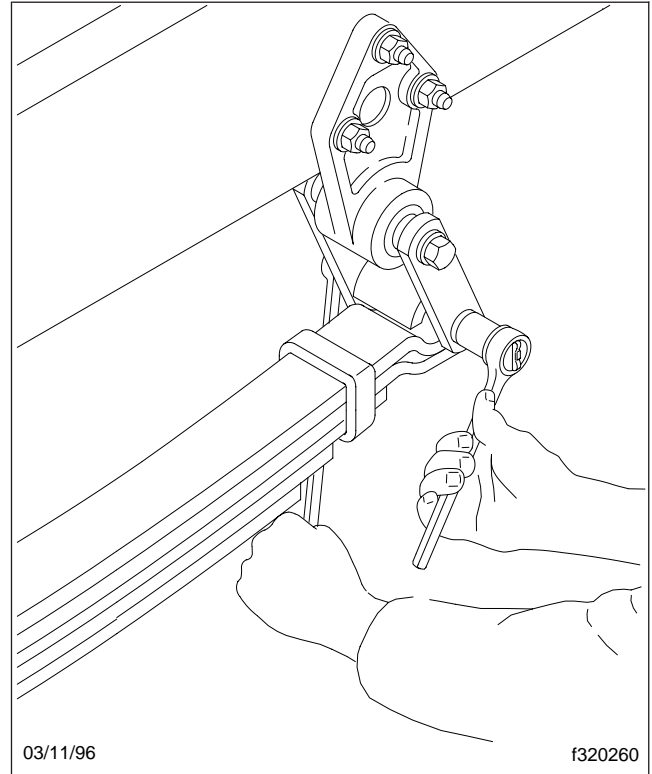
, Spring Shackle Lower Bolt Removal/Installation (typical)
